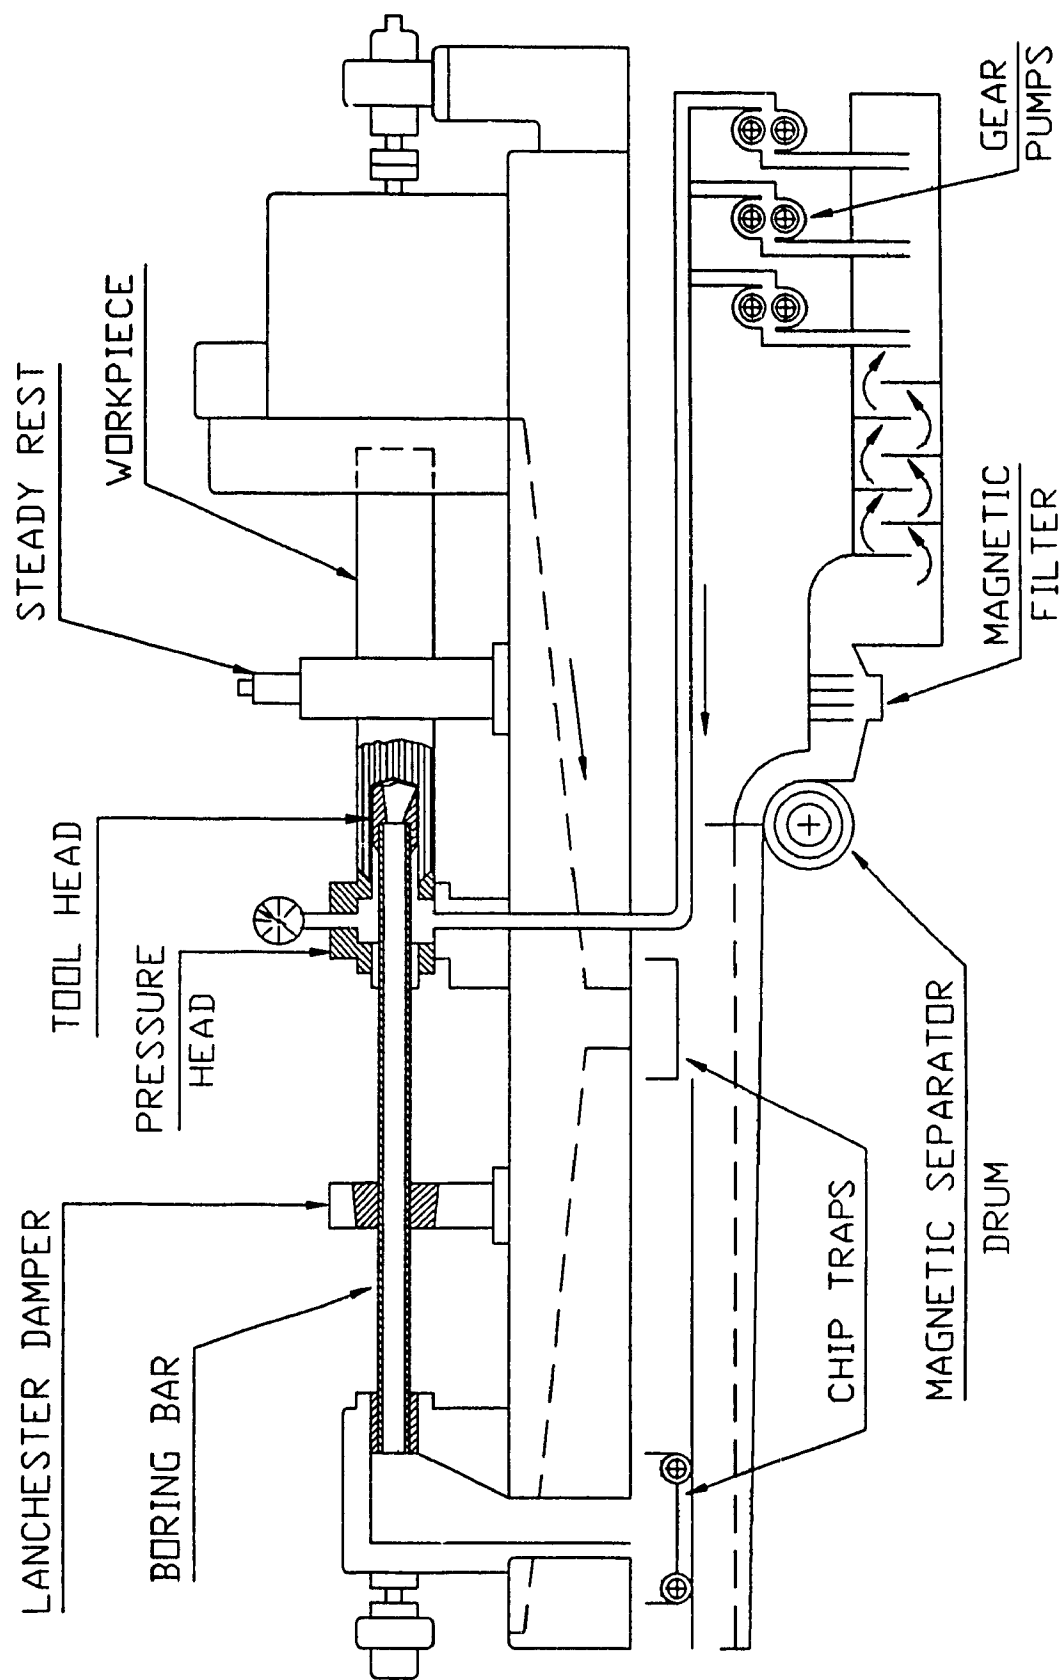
THE PRINCIPLE OF BTA MACHINING
